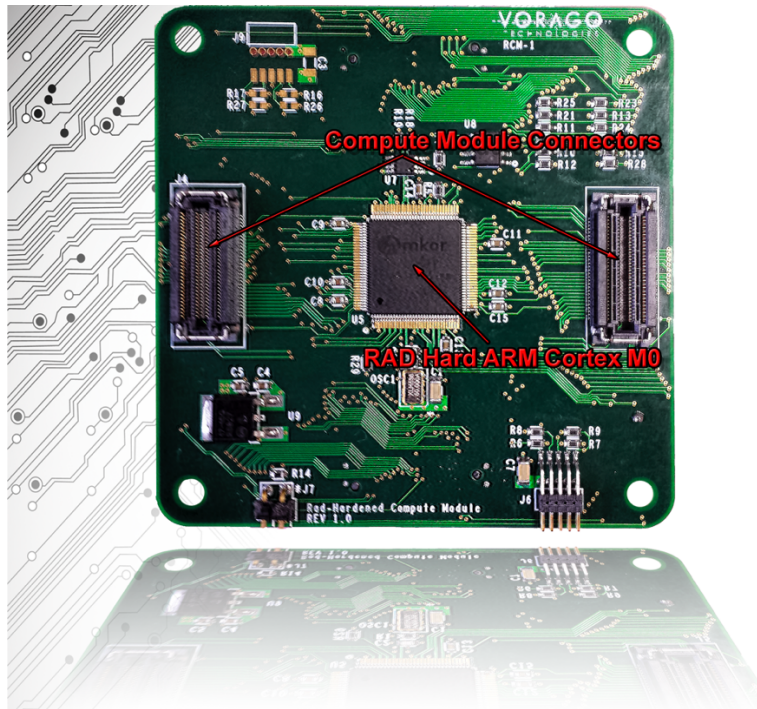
PHOTO OF COMPUTE MODULE PCB PROTOTYPE
